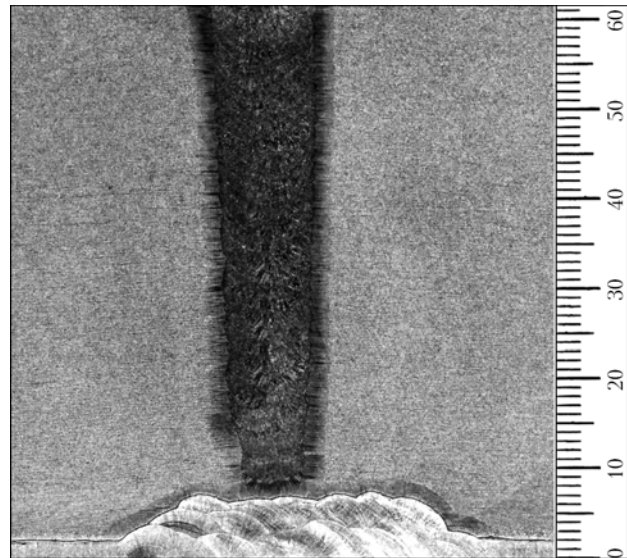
Macro-section of reference welded joint of steel 10GN2MFA produced by narrow-gap AAW in mixture of He + 30 % Ar
